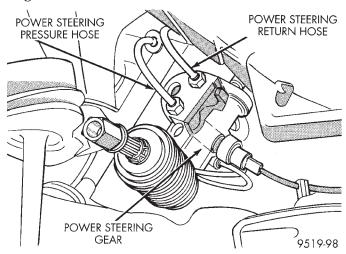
Power Steering Pressure And Return Hose At Steering Gear
